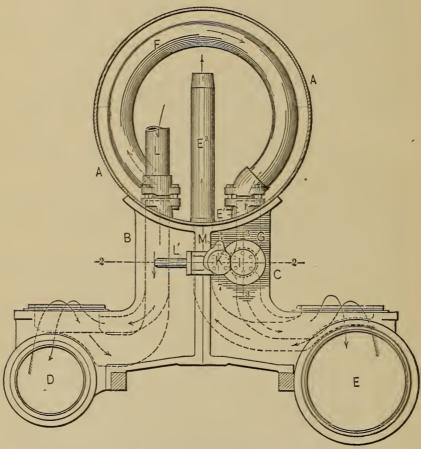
Front Elevation (partly in Vertical Cross Section)
